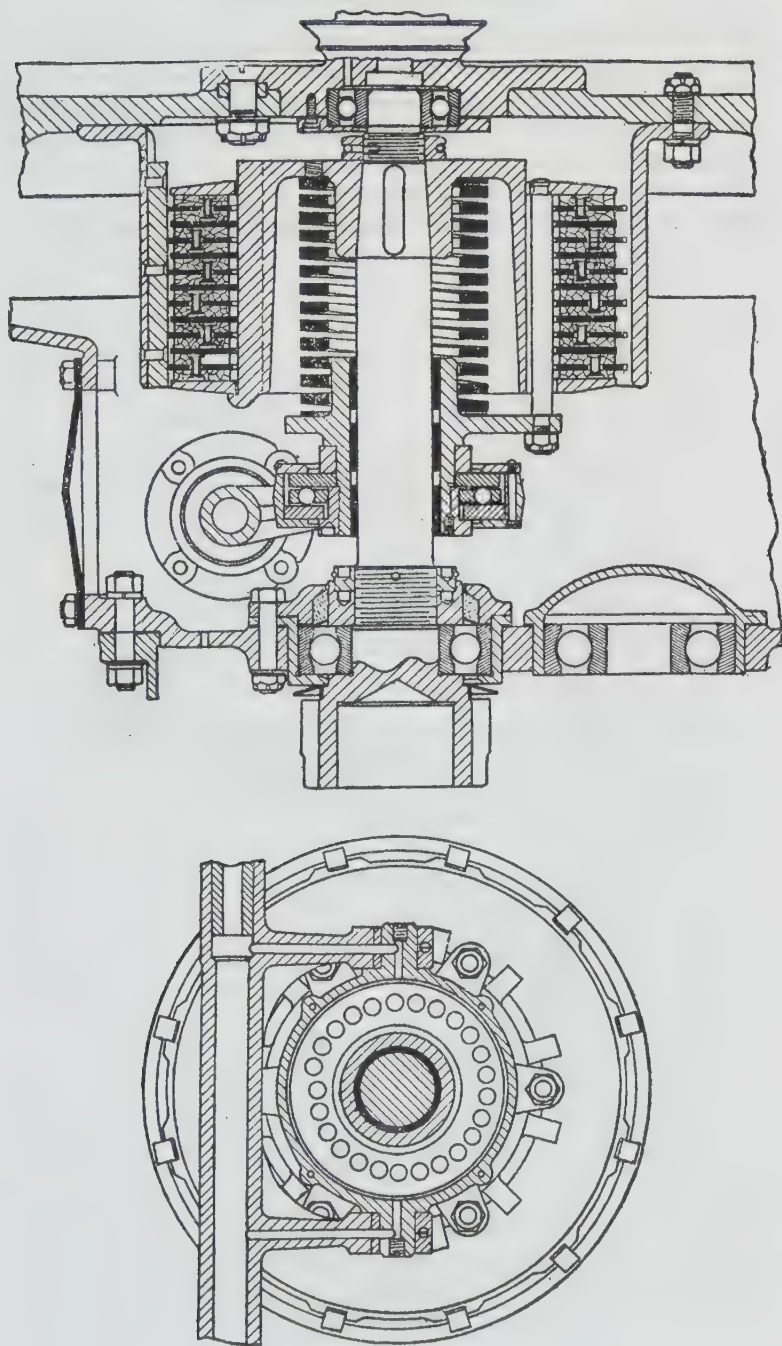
DRY DISC CLUTCH (PACKARD.)
